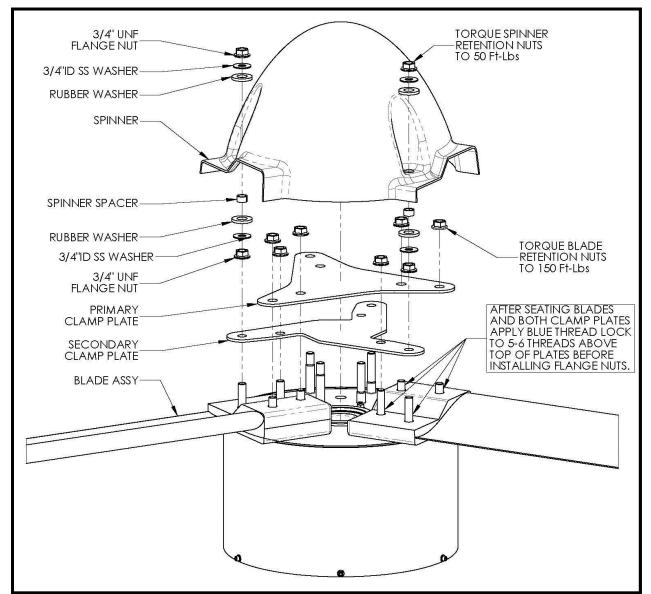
EXCEL Blade, Clamp Plate and Spinner Attachment
